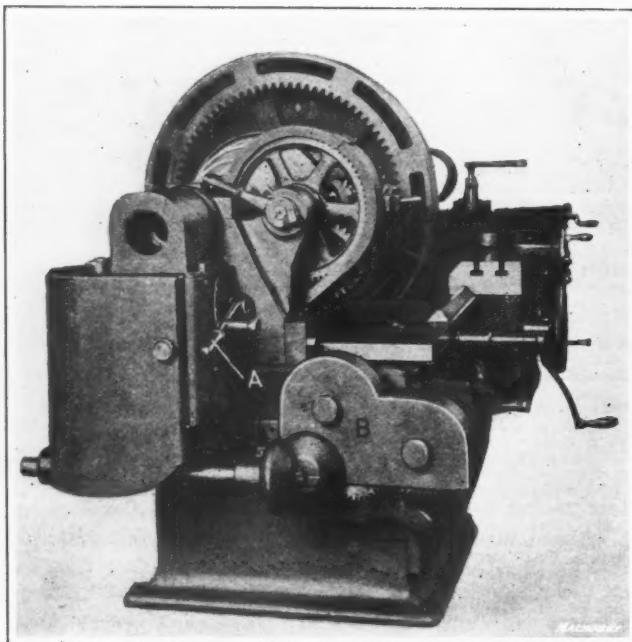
End View of Lathe showing Arrangement for obtaining Feed Changes
